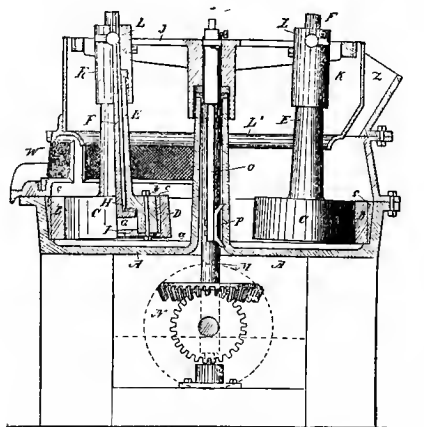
HUNTINGTON MILLING MACHINE. Section.
